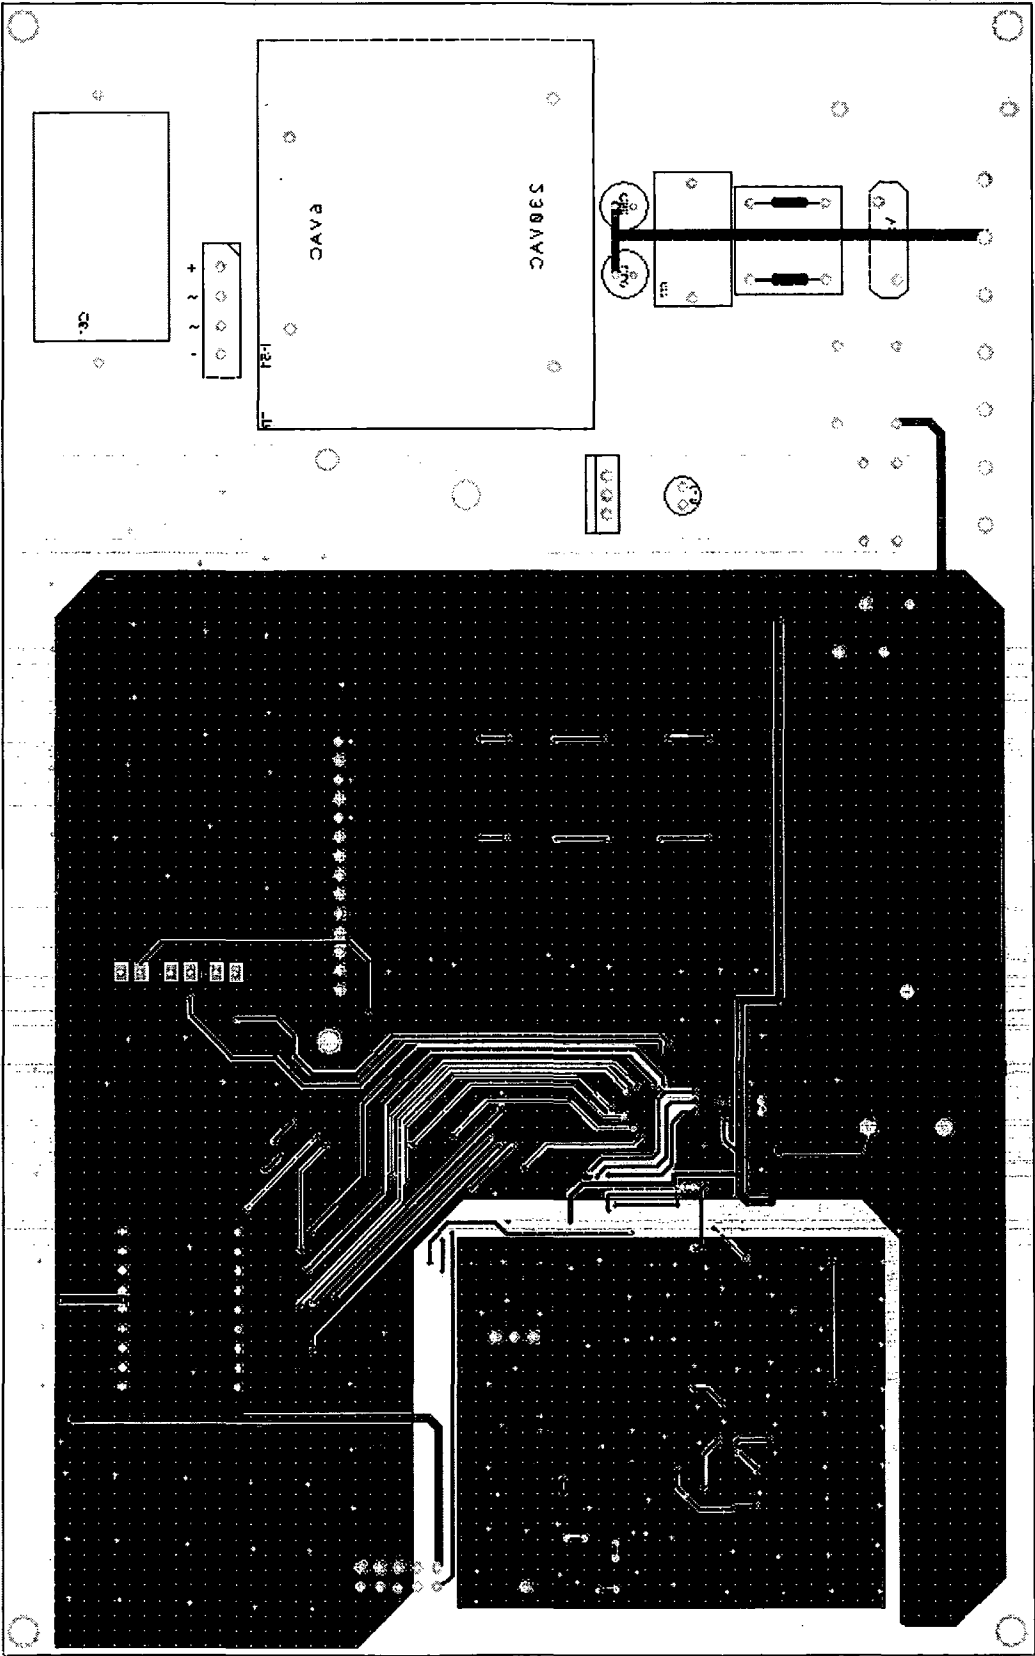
Pre-Production Controller PCB Layout (Bottom Layout)
